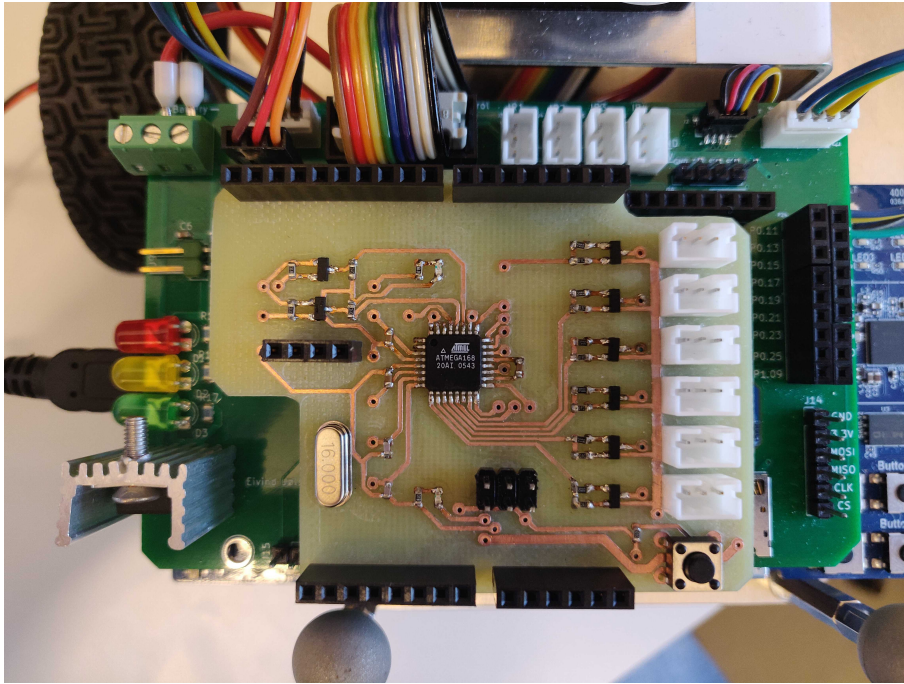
Assembled PCB stacked on top of the nRF shield
